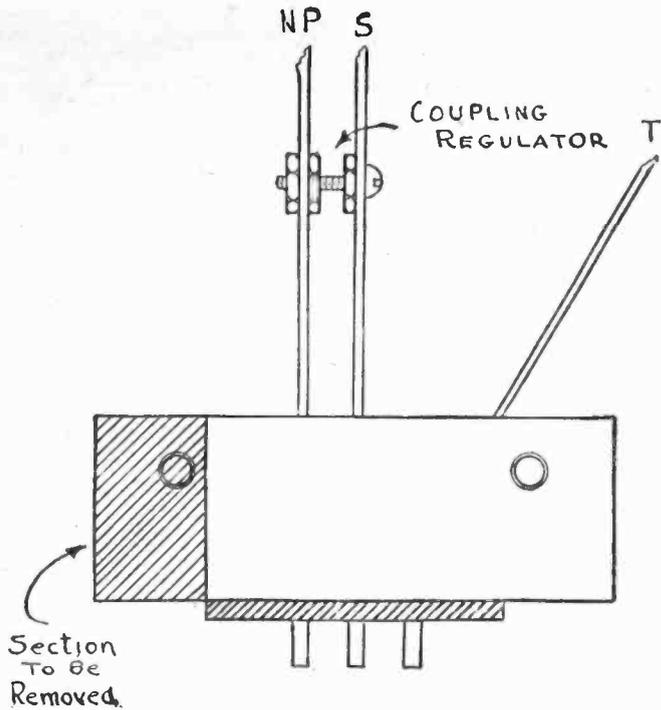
The alterations of the three-coil mounting are clearly indicated. The manufacturer of this type of coil has since produced a unit in which similar features have been permanently included, as may be seen by referring to Fig. 9.
